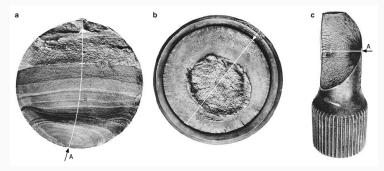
Typical fatigue fractures. a. bending fatigue fracture on the eccentric shaft of a crusher ($d=230\,\mathrm{mm}$) at the transition from the shaft to the eccentric, b. Circular bending fatigue fracture on the driving axis of a tilting plow. Cause: too small fillet radius, c. torsional fatigue failure on a torsion bar spring [1].
